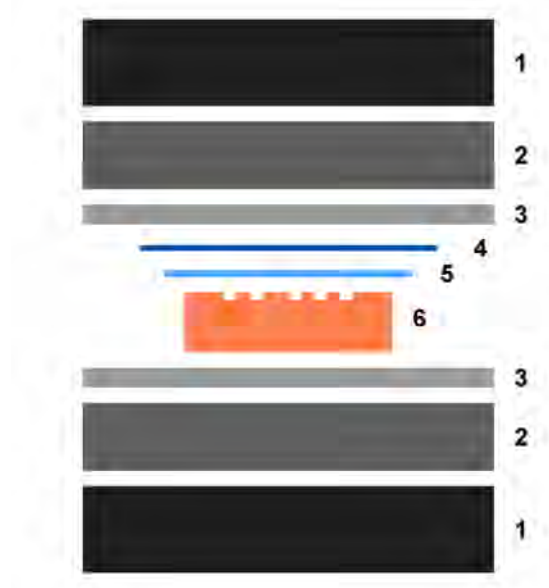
Disposition of platens and shims for hot embossing technique. 1, 2) Aluminum platens. 3) Stainless steel sheet. 4) Stainless steel shim. 5) Chip substrate material. 6) Embossing mold.
